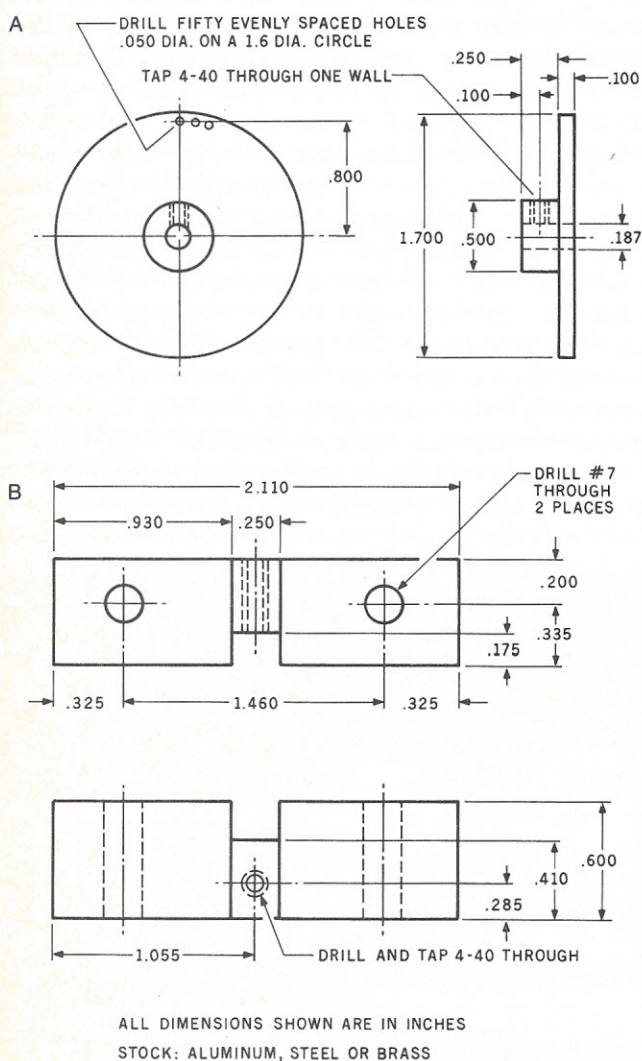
Two specially fabricated parts are required for adaptation of the General Motors power window motor assemblies. Each motor requires an optical encoder disk (a) and a mounting bracket (b) for the MCT-8 optical limit switch. Both parts are fabricated out of aluminum. The parts are shown assembled in Photo 2, as mounted on one of the Ambulatron drive motors.
